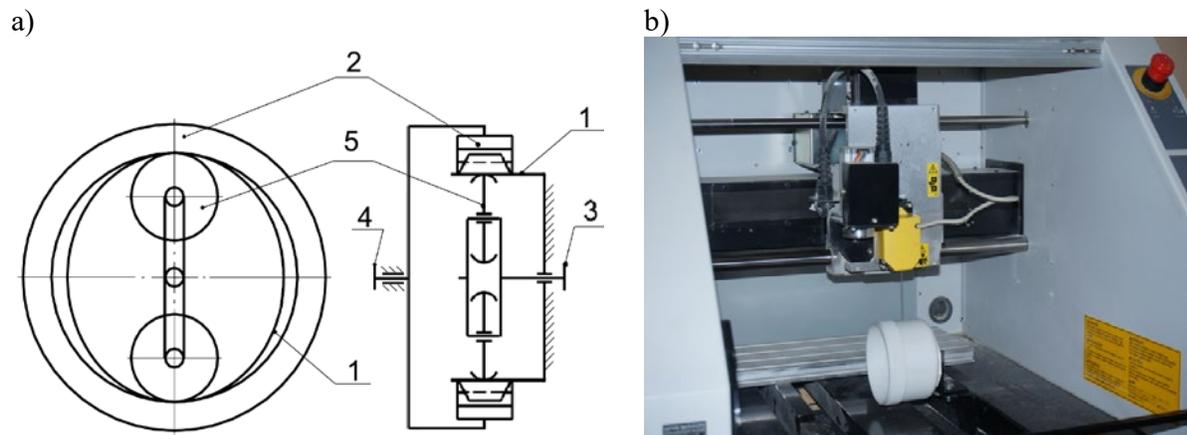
Harmonic drive: a) scheme: 1-flexspline, 2-circular spline, 3-input shaft, 4-output shaft, 5-two-roll generator, b) measurement of the profile of the flexspline in a longitudinal section on the Roland MDX-40 cnc milling machine.
